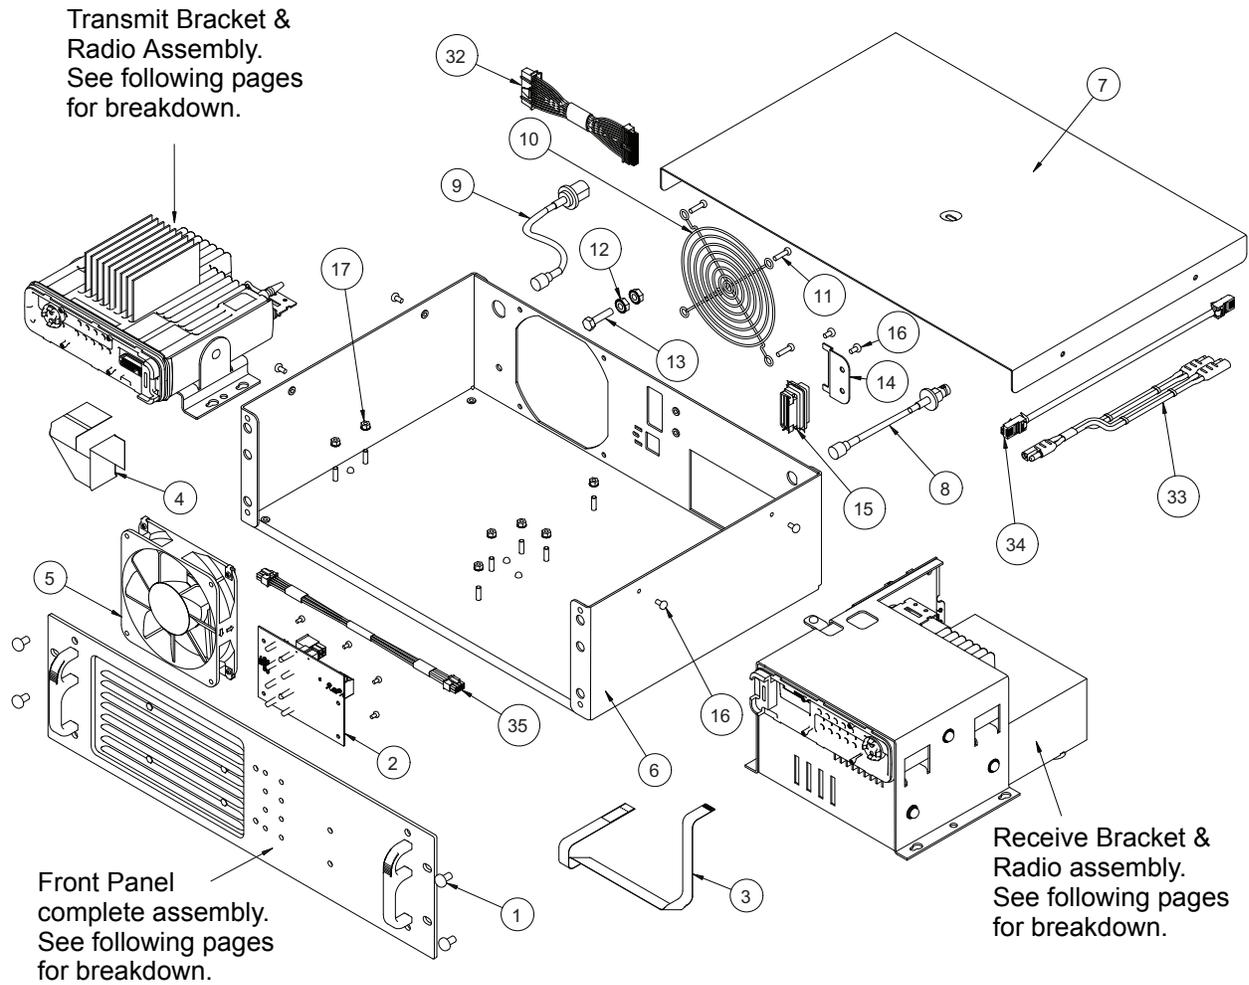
Repeater Assembly Exploded View (VHF/UHF 32 MB Repeaters)
